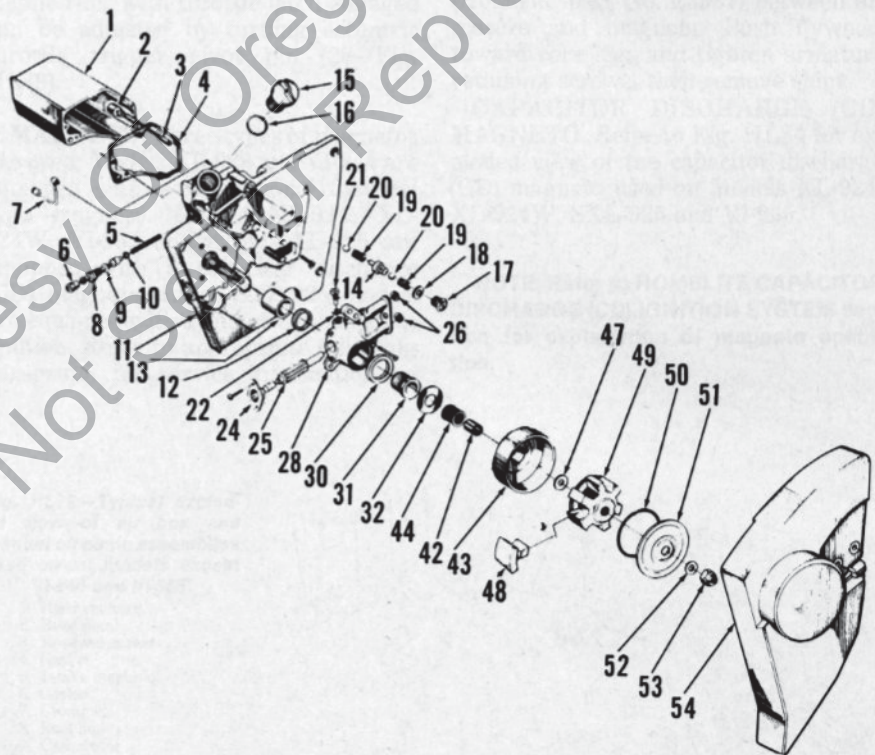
Exploded view of Model 1050 Automatic chain oiler pump and related parts; other models are similar except for ball bearing main instead of needle bearing. Refer to Fig. HL74 for view showing pump operation.
